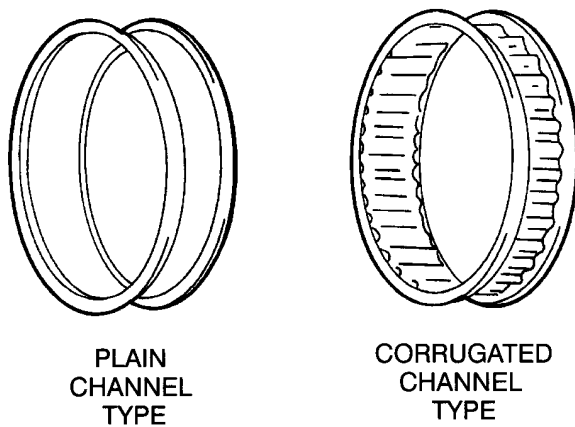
Rim Spacers Used on Dual Rear Spoke Wheels
